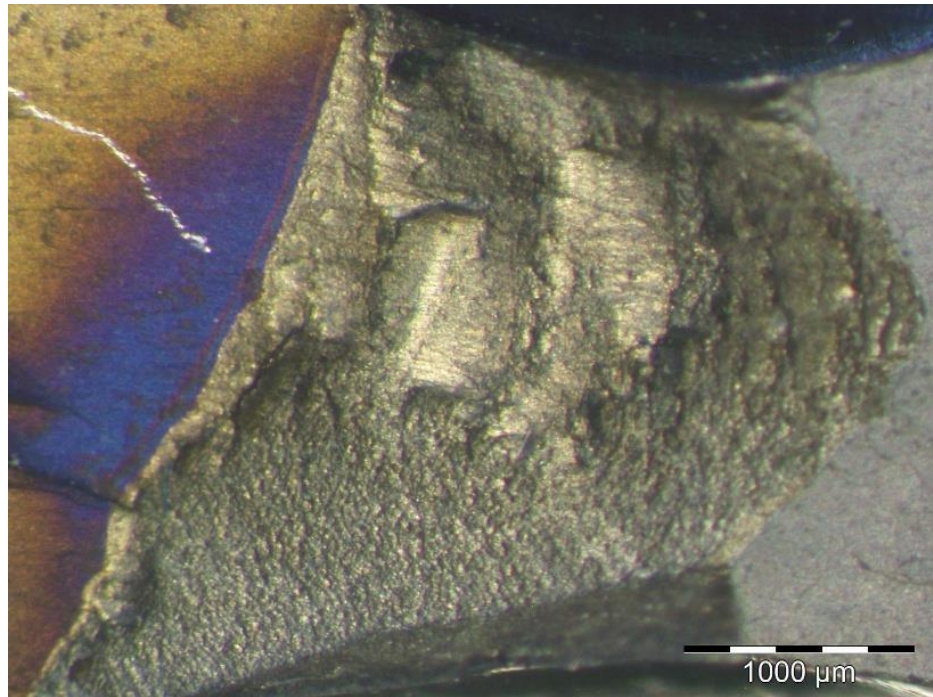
Stereo microscope image of crack surface after fracture testing for test temperature 275°C.
